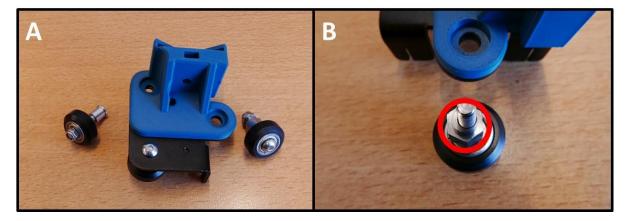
Mounting the E Slide Mount. A) E Slide mount fitted to the E Plate. B) Eccentric adjuster for the guidance mechanism.
